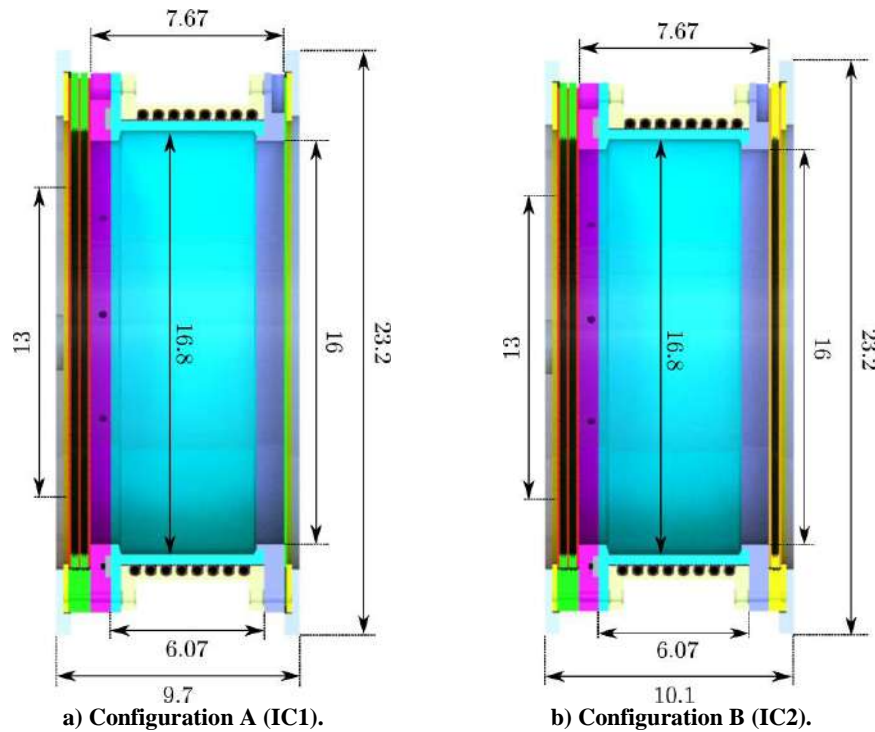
CAD drawings of the cross-sectional views of the DST thruster for Configuration A and Configuration B. All dimensions are in cm.
